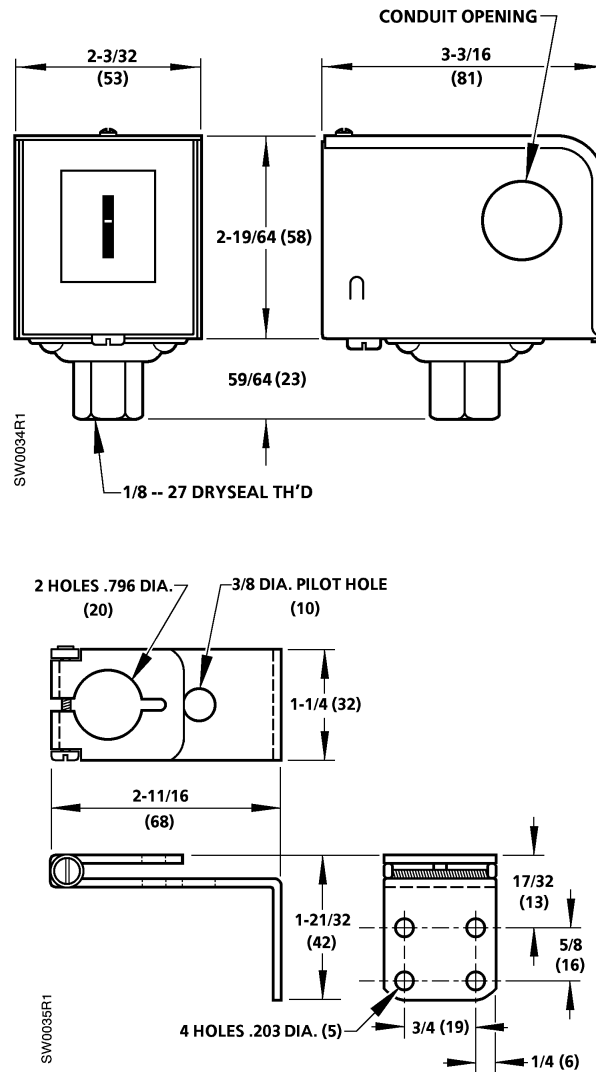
Dimensions of the 134-1460 Pressure Electric Switch and Mounting Bracket.
